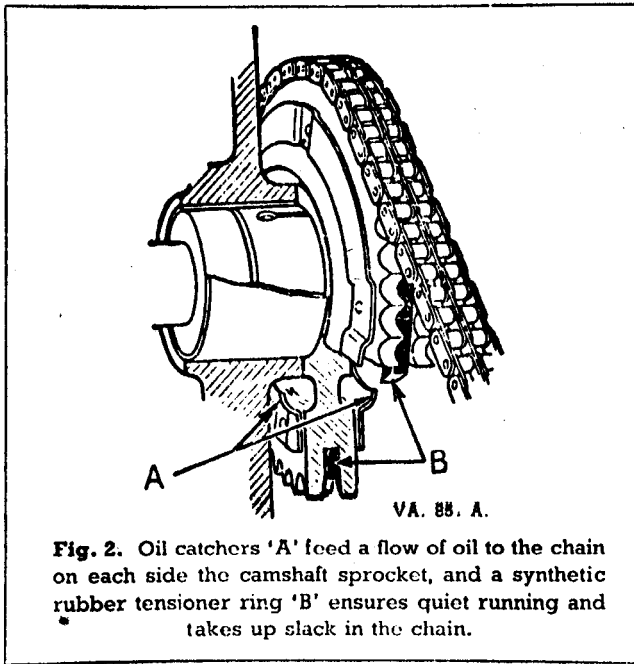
Oil catchers 'A' feed a flow of oil to the chain on each side the camshaft sprocket, and a synthetic rubber tensioner ring 'B' ensures quiet running and takes up slack in the chain.
